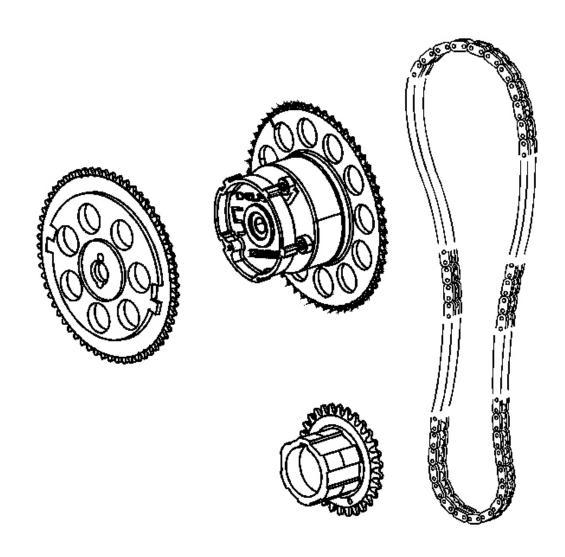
View Of Timing Chain & Sprockets Courtesy of GENERAL MOTORS CORP.
